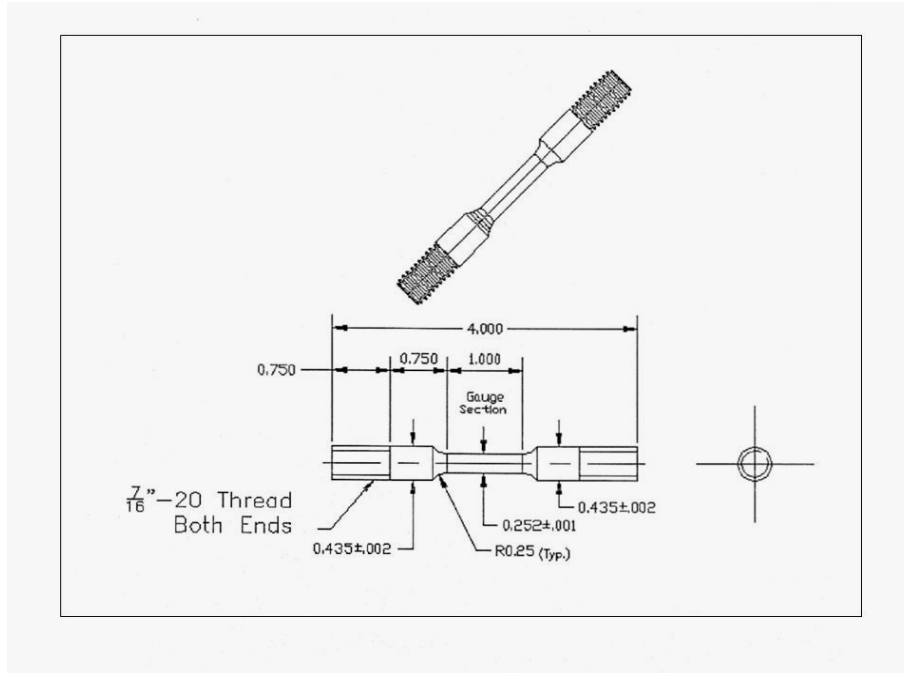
Engineering drawing and photograph indicating the dimensions of the tensile samples used in this project.
